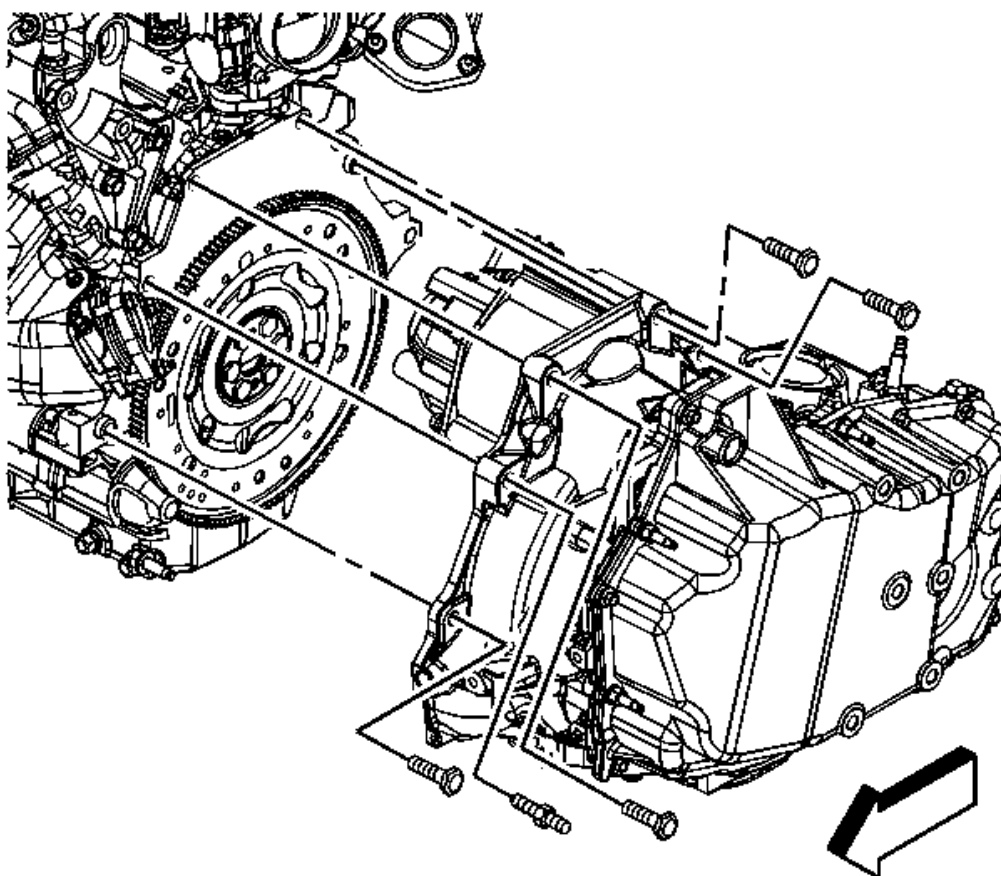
View Of Transaxle-To-Engine Bolts/Studs
